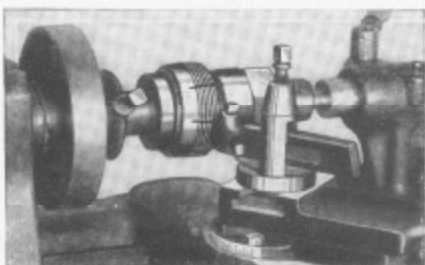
Cutting a Screw Thread on a Replacement Part for an Orphan Car.
